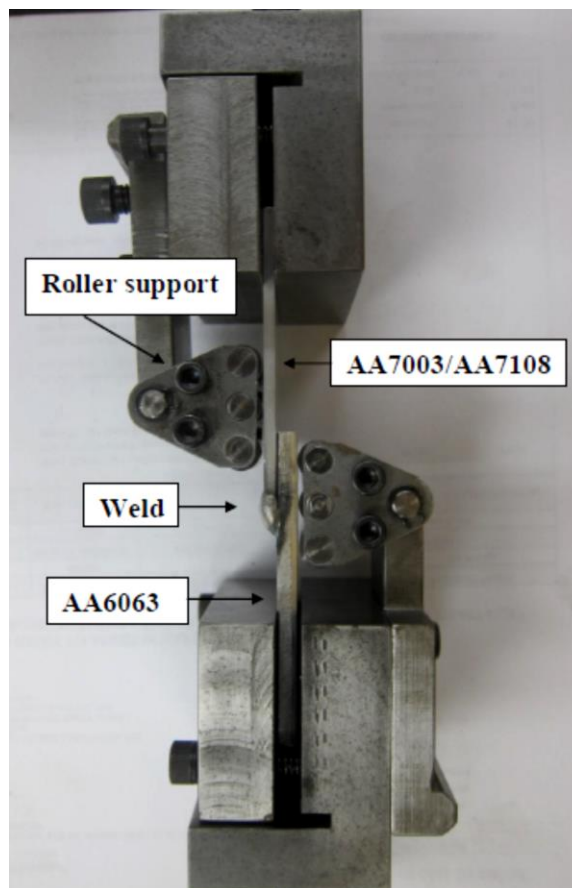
Typical arrangement of a AA7xxx lap-joint weld in the custom jig - all major weld assembly parts are labeled.
